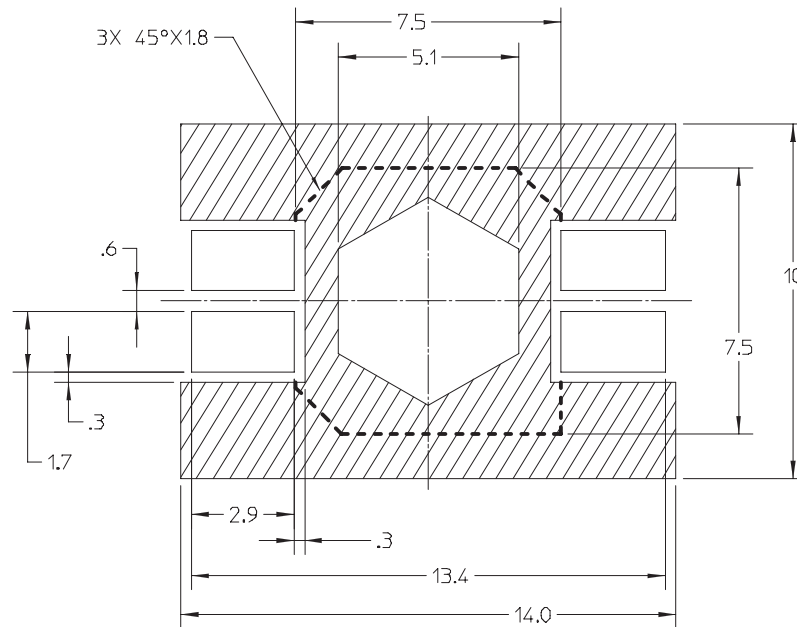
4-lead Gullwing Package Solder Pad Layout.
